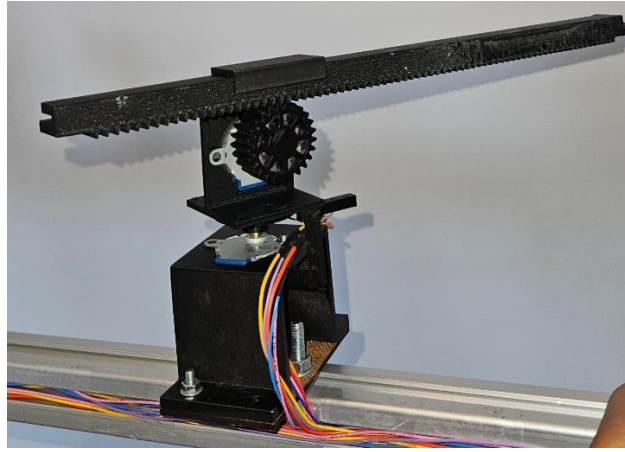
Full assembly of the actuation arm fitted with the stepper motors and mounted onto the prototype.
